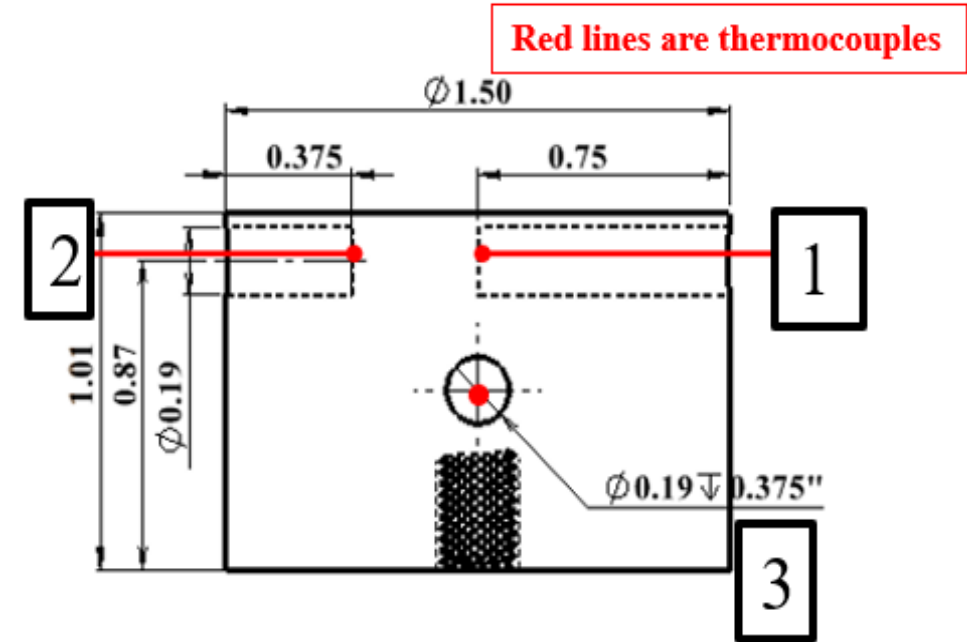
Copper Block w/ thermocouple holes cross-sectional view
